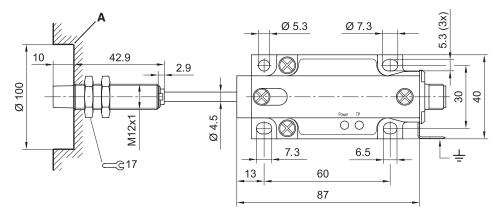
Dimensions for BIS L-409-045-003-07-S4 processor [mm]
